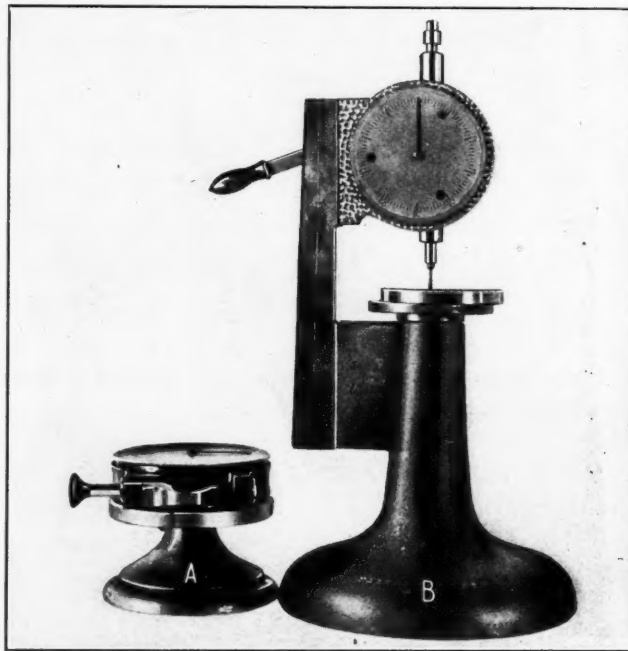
Upright and "Fine" Multiplying Gages used for measuring the Various Parts of a Watch during Process of Manufacture
